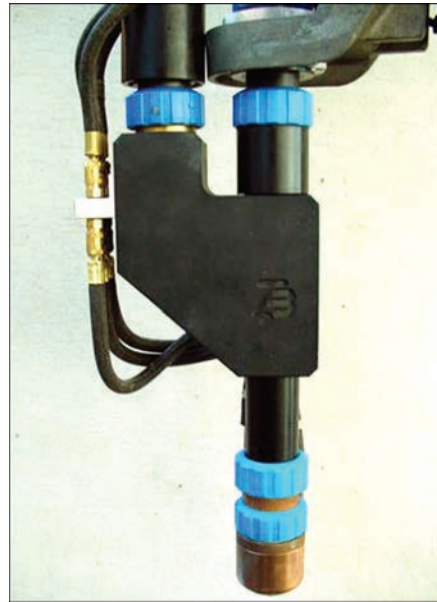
Composite anode of Merkle hybrid torch for plasma-MIG welding with coaxial wire feed
